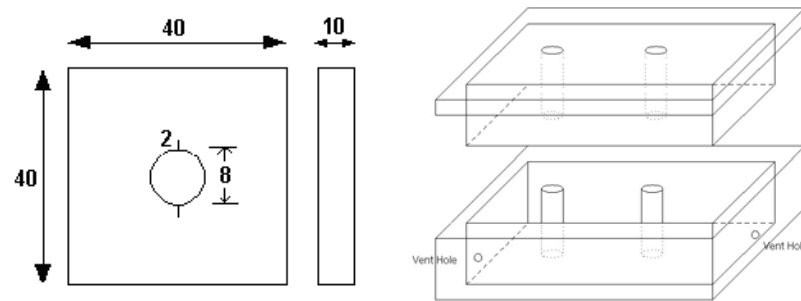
The shape of DCDC and the schematic diagram of hot plate mold.
